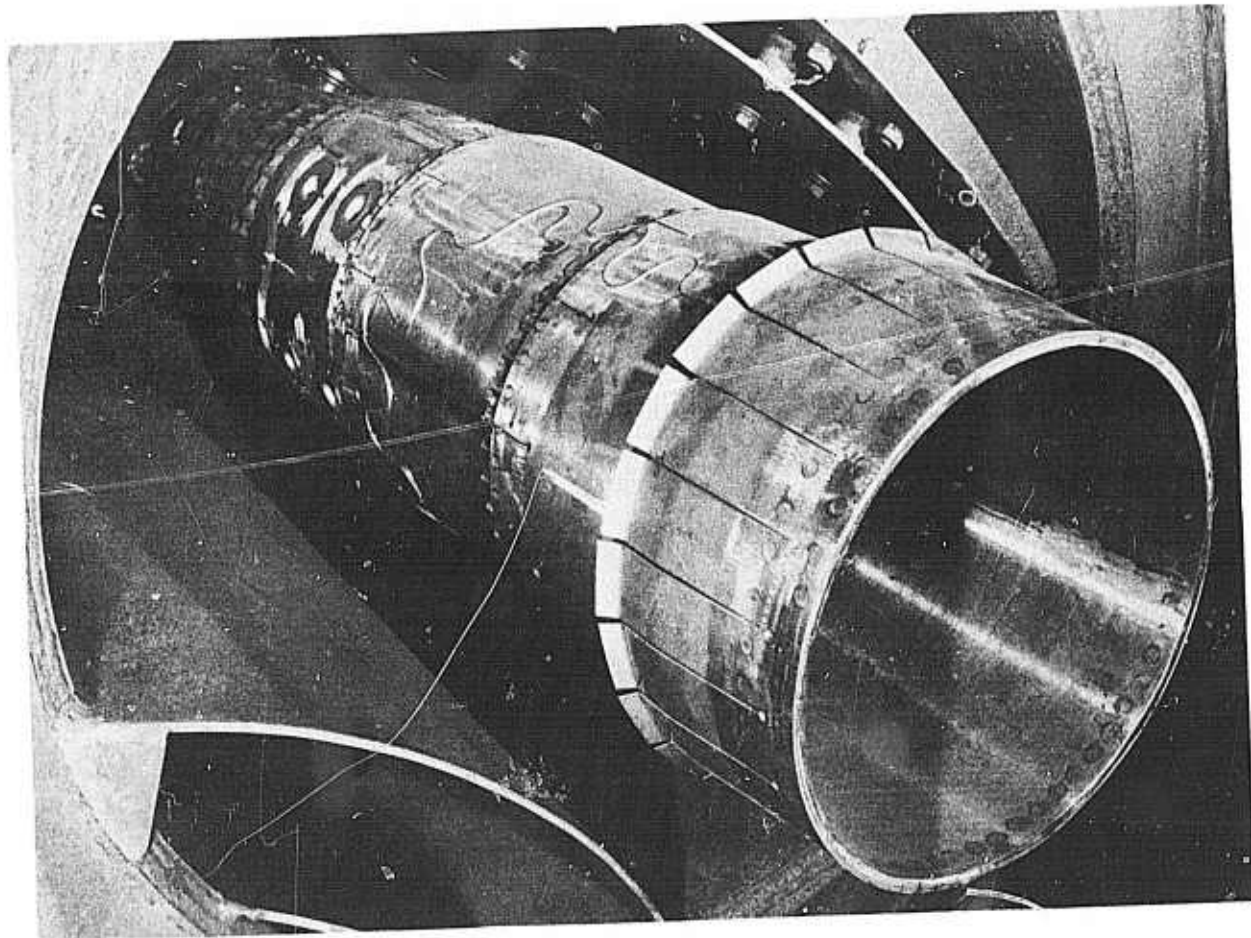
New Combustor with Additional Secondary Wall Cooling
